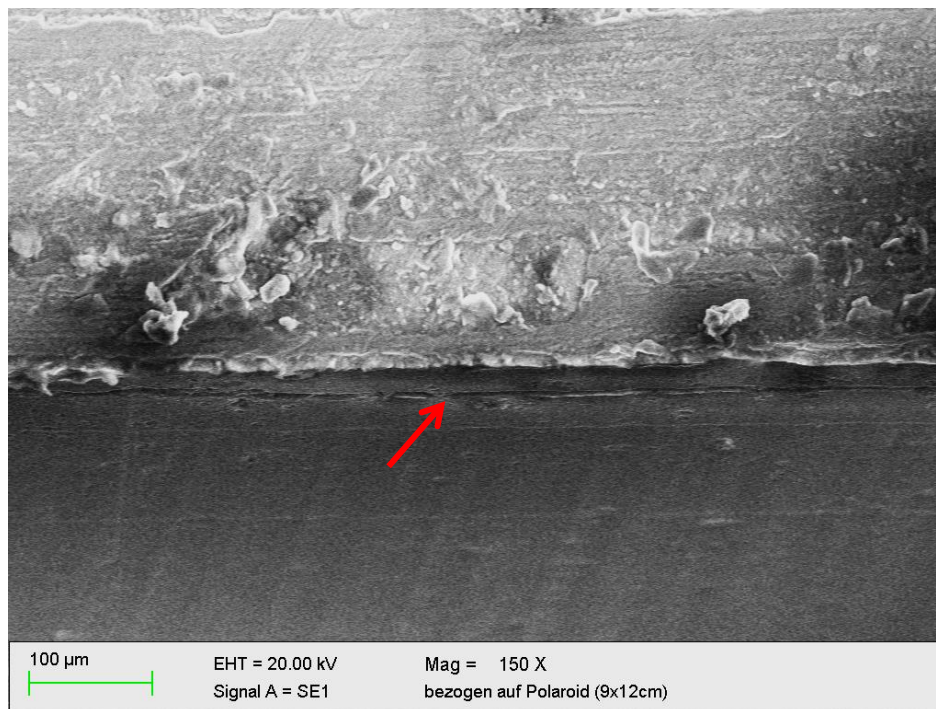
SEM image of the broken specimen: secondary crack (arrow) below the fracture origination point.
